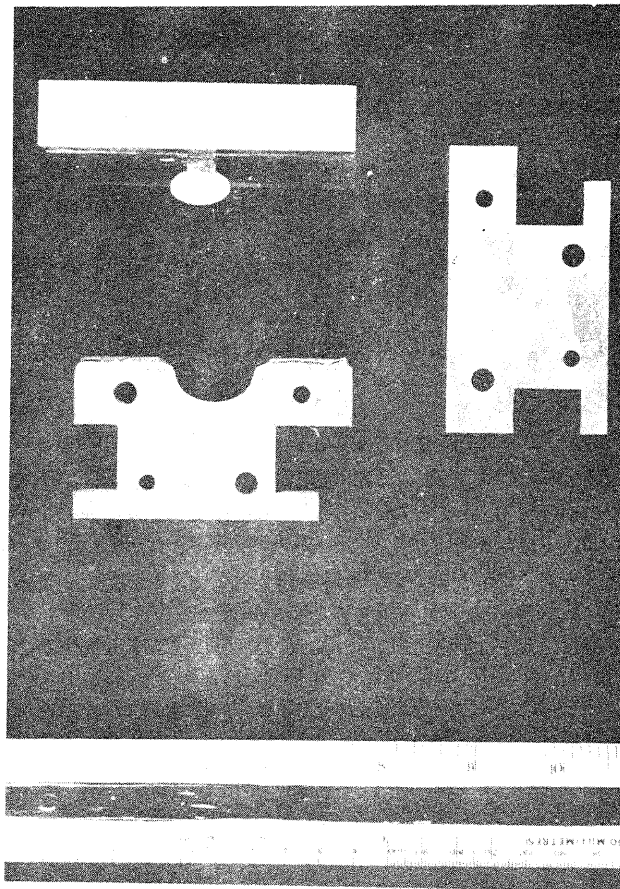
ELIPTIC CATHODE AND WORKPIECE BEFORE AND AFTER MACHINING
